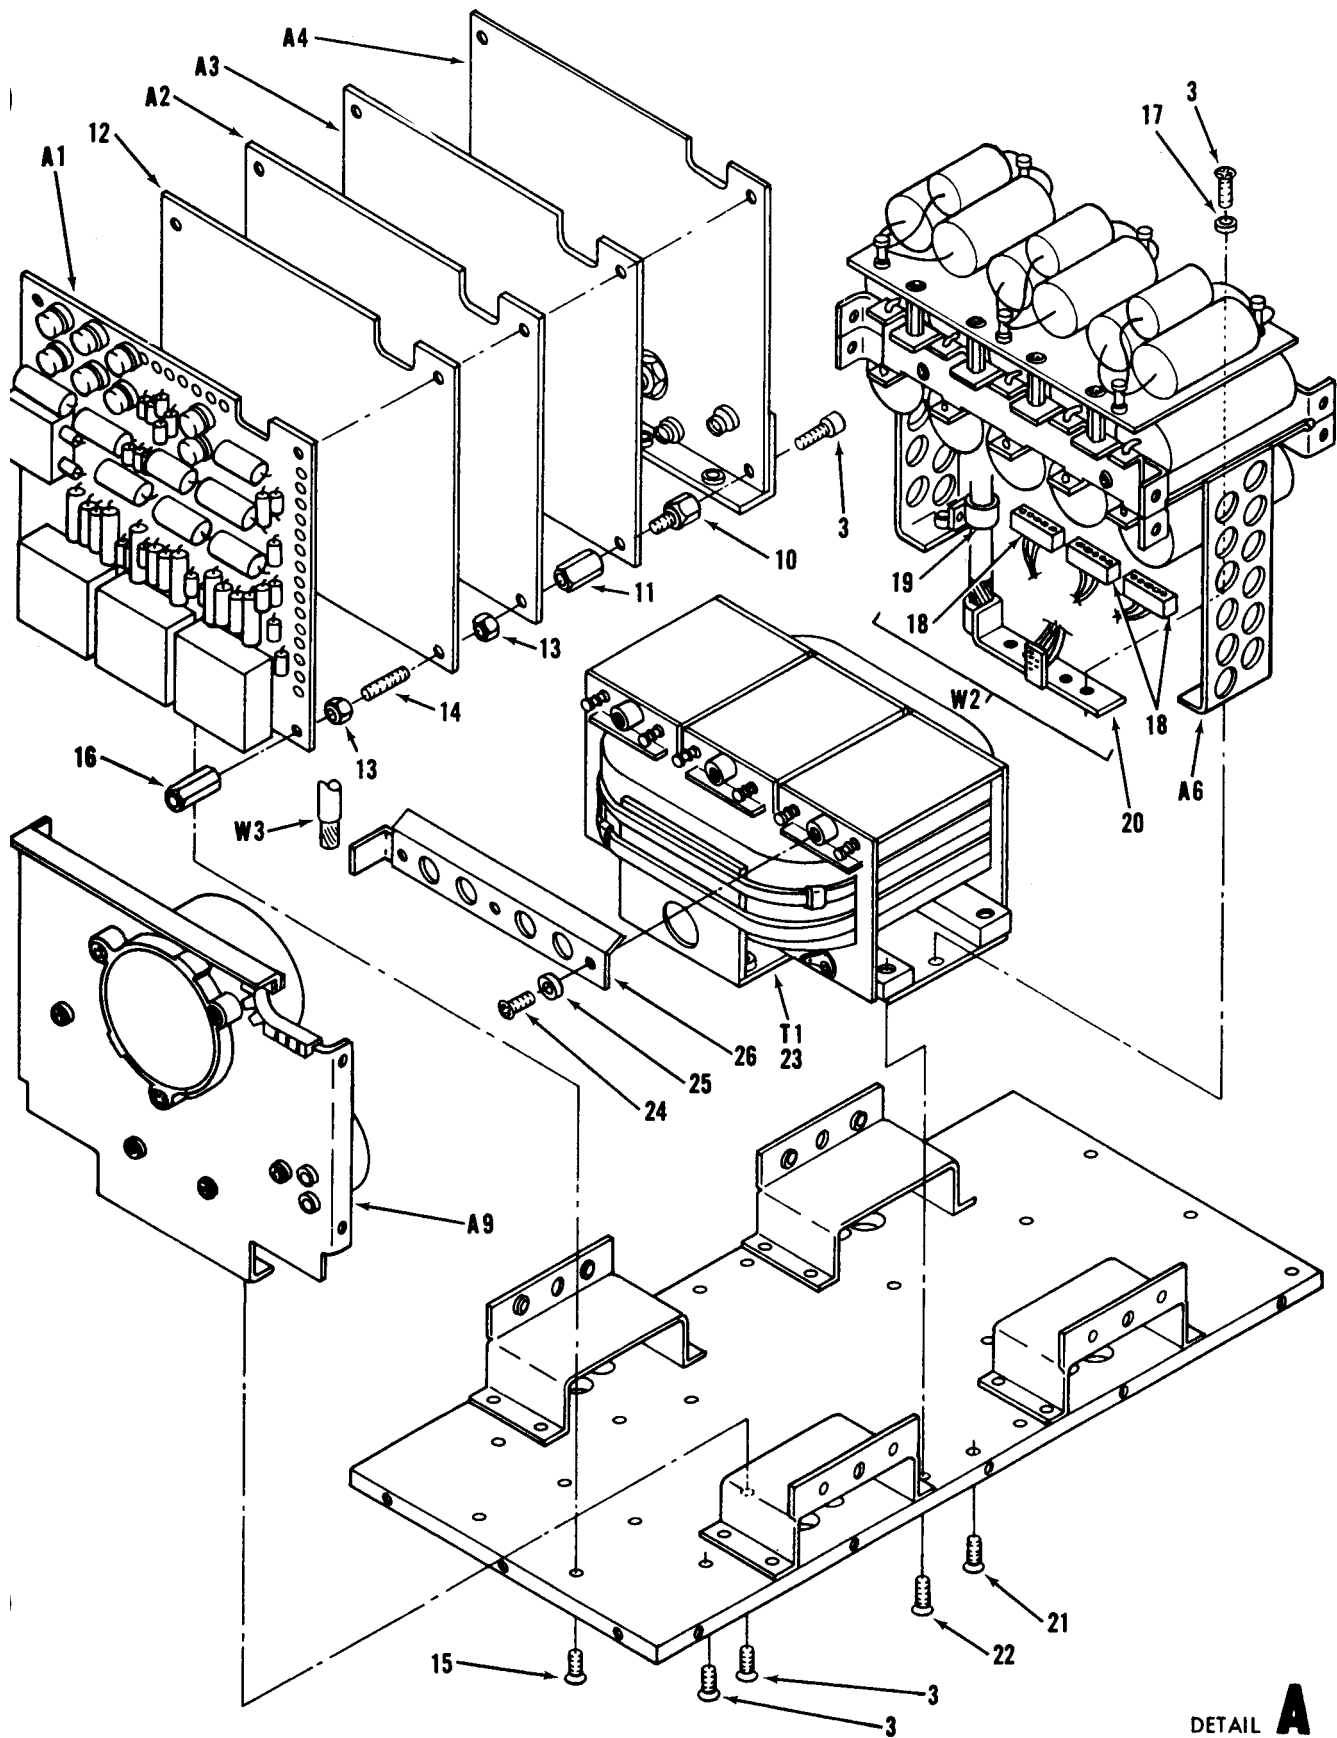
© General assembly, PP-7274/A (sheet 1 of 2).
